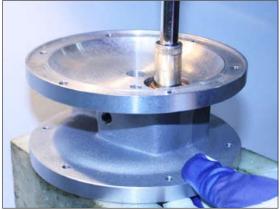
press out the air valve with for instance a wood shaft of a hammer or by means of a pressing device. Always be careful, so that you do not damage the sealing edges towards the diaphragm or the air valve.
